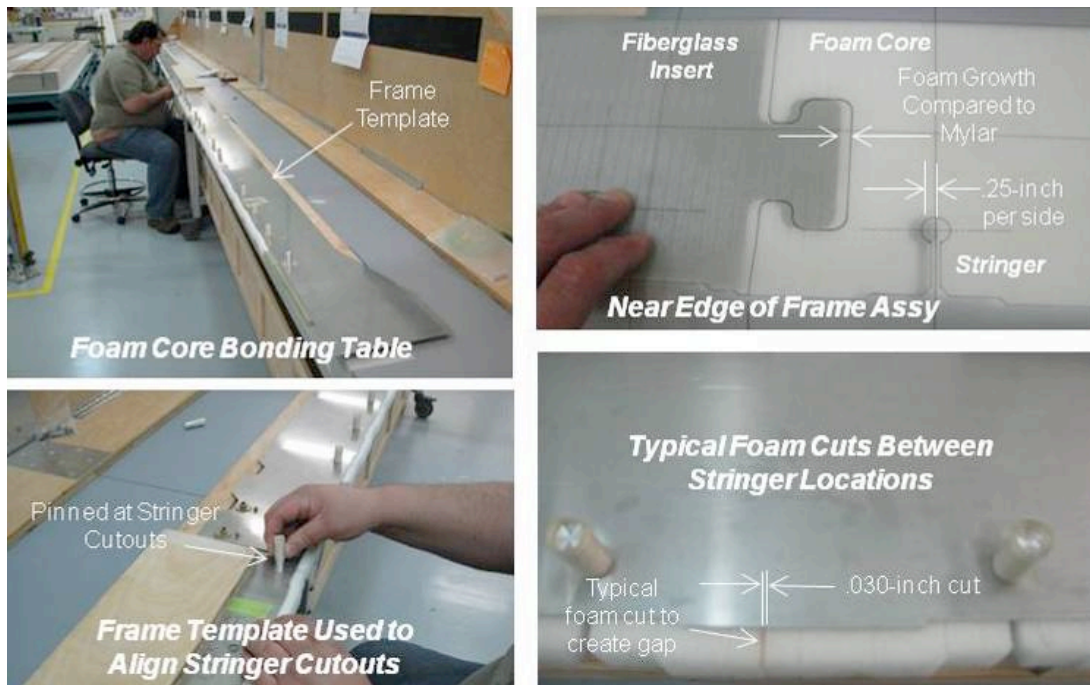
Foam Core Rework was Required to Bring the Stringer Key Hole Locations within Tolerance
